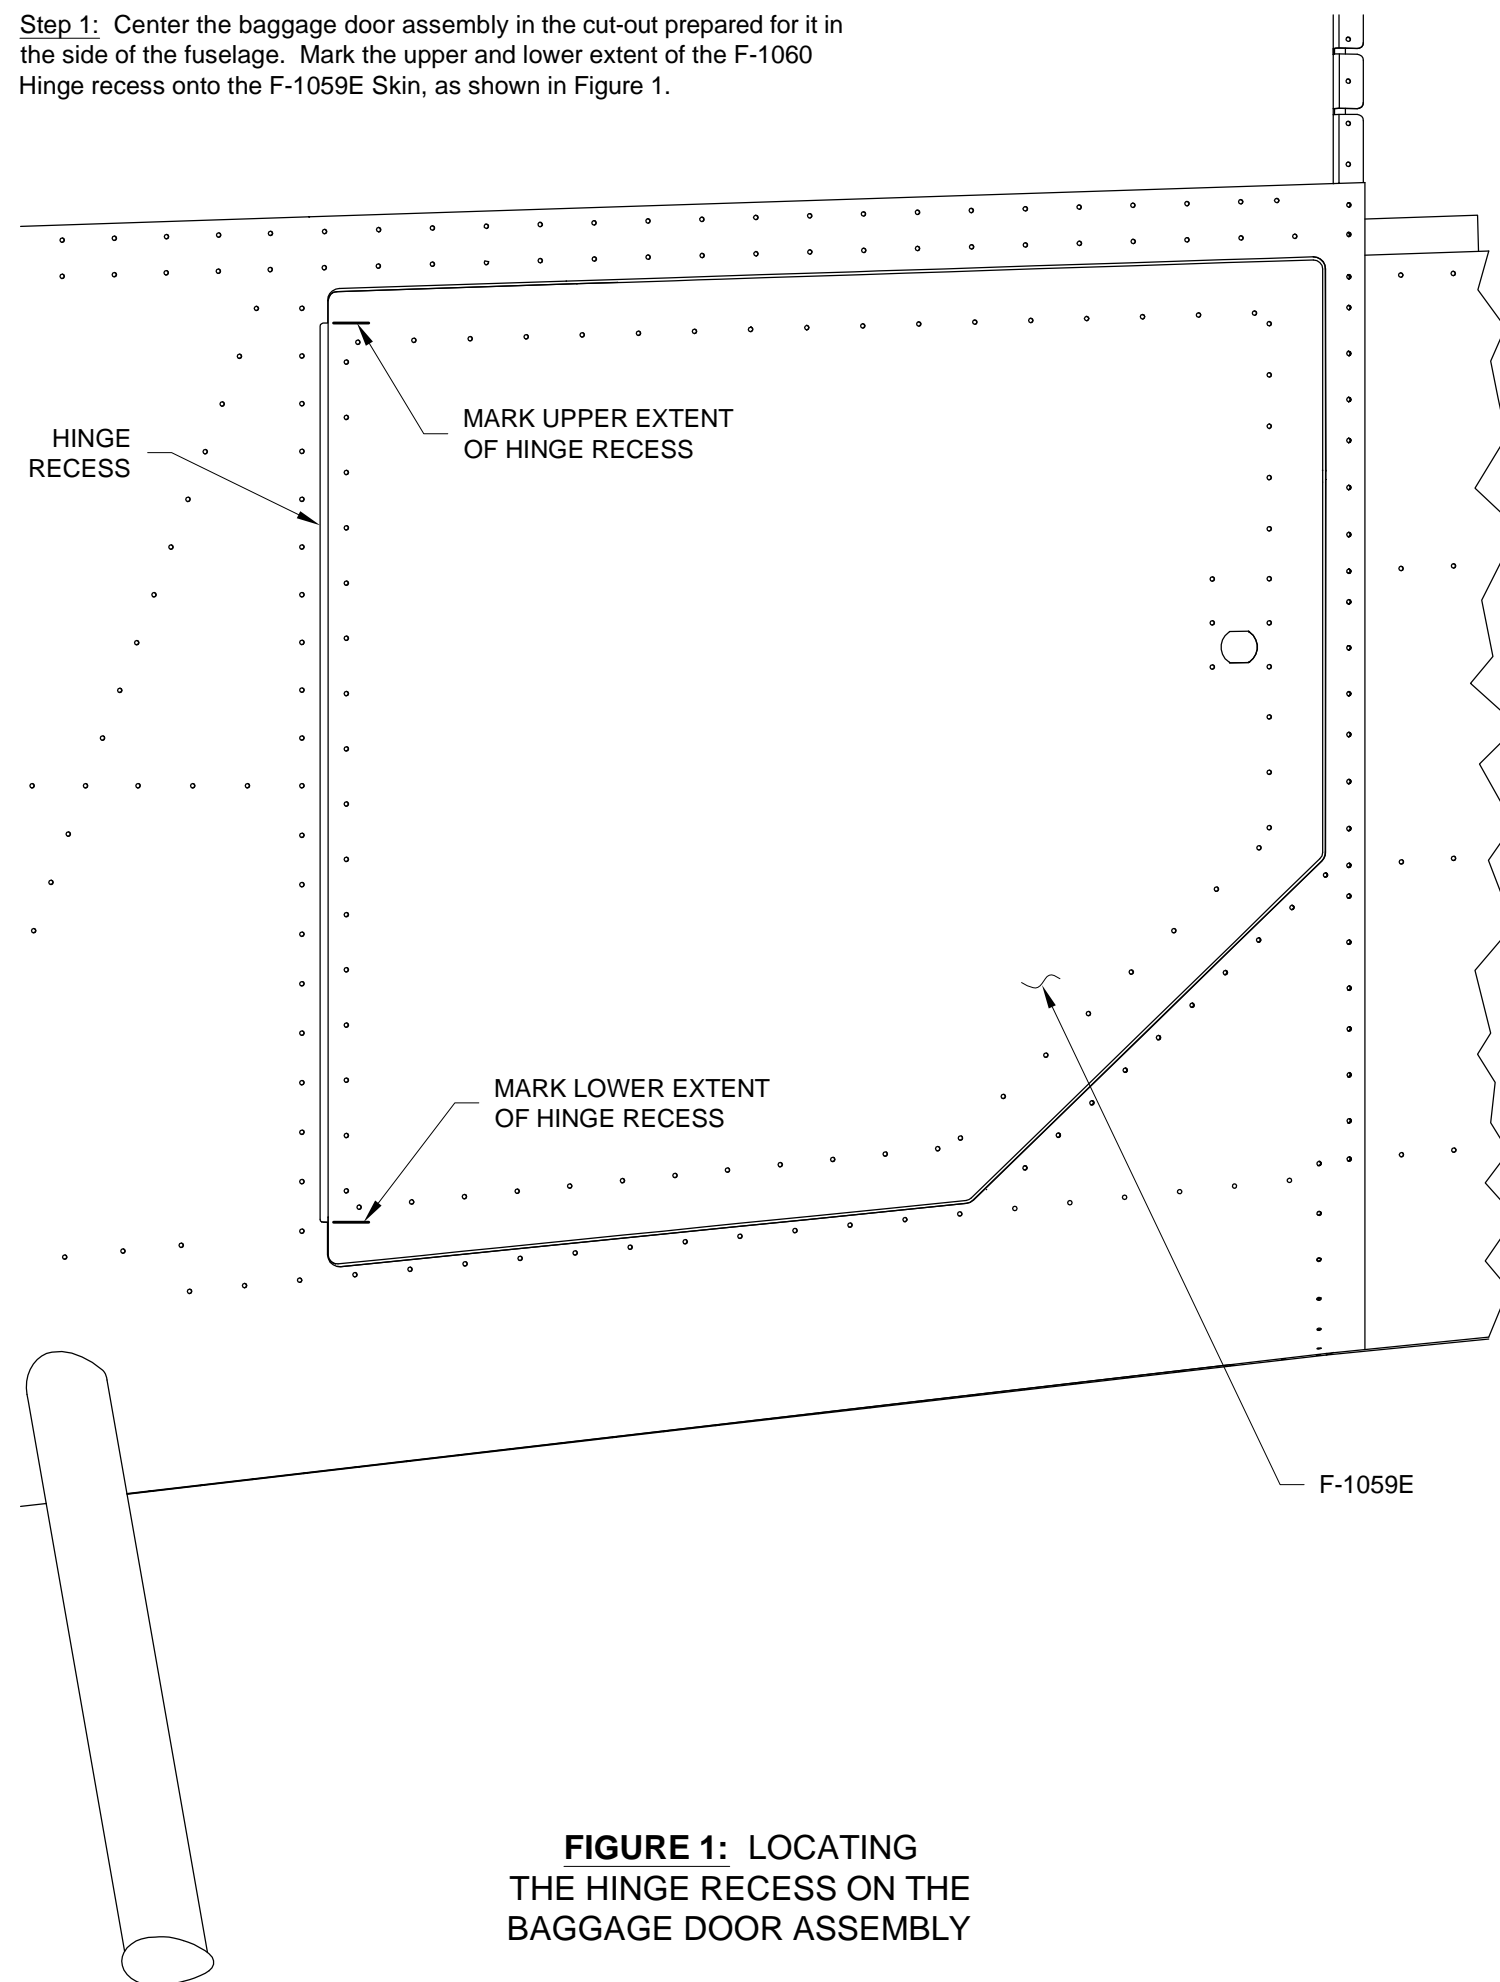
LOCATING THE HINGE RECESS ON THE BAGGAGE DOOR ASSEMBLY
